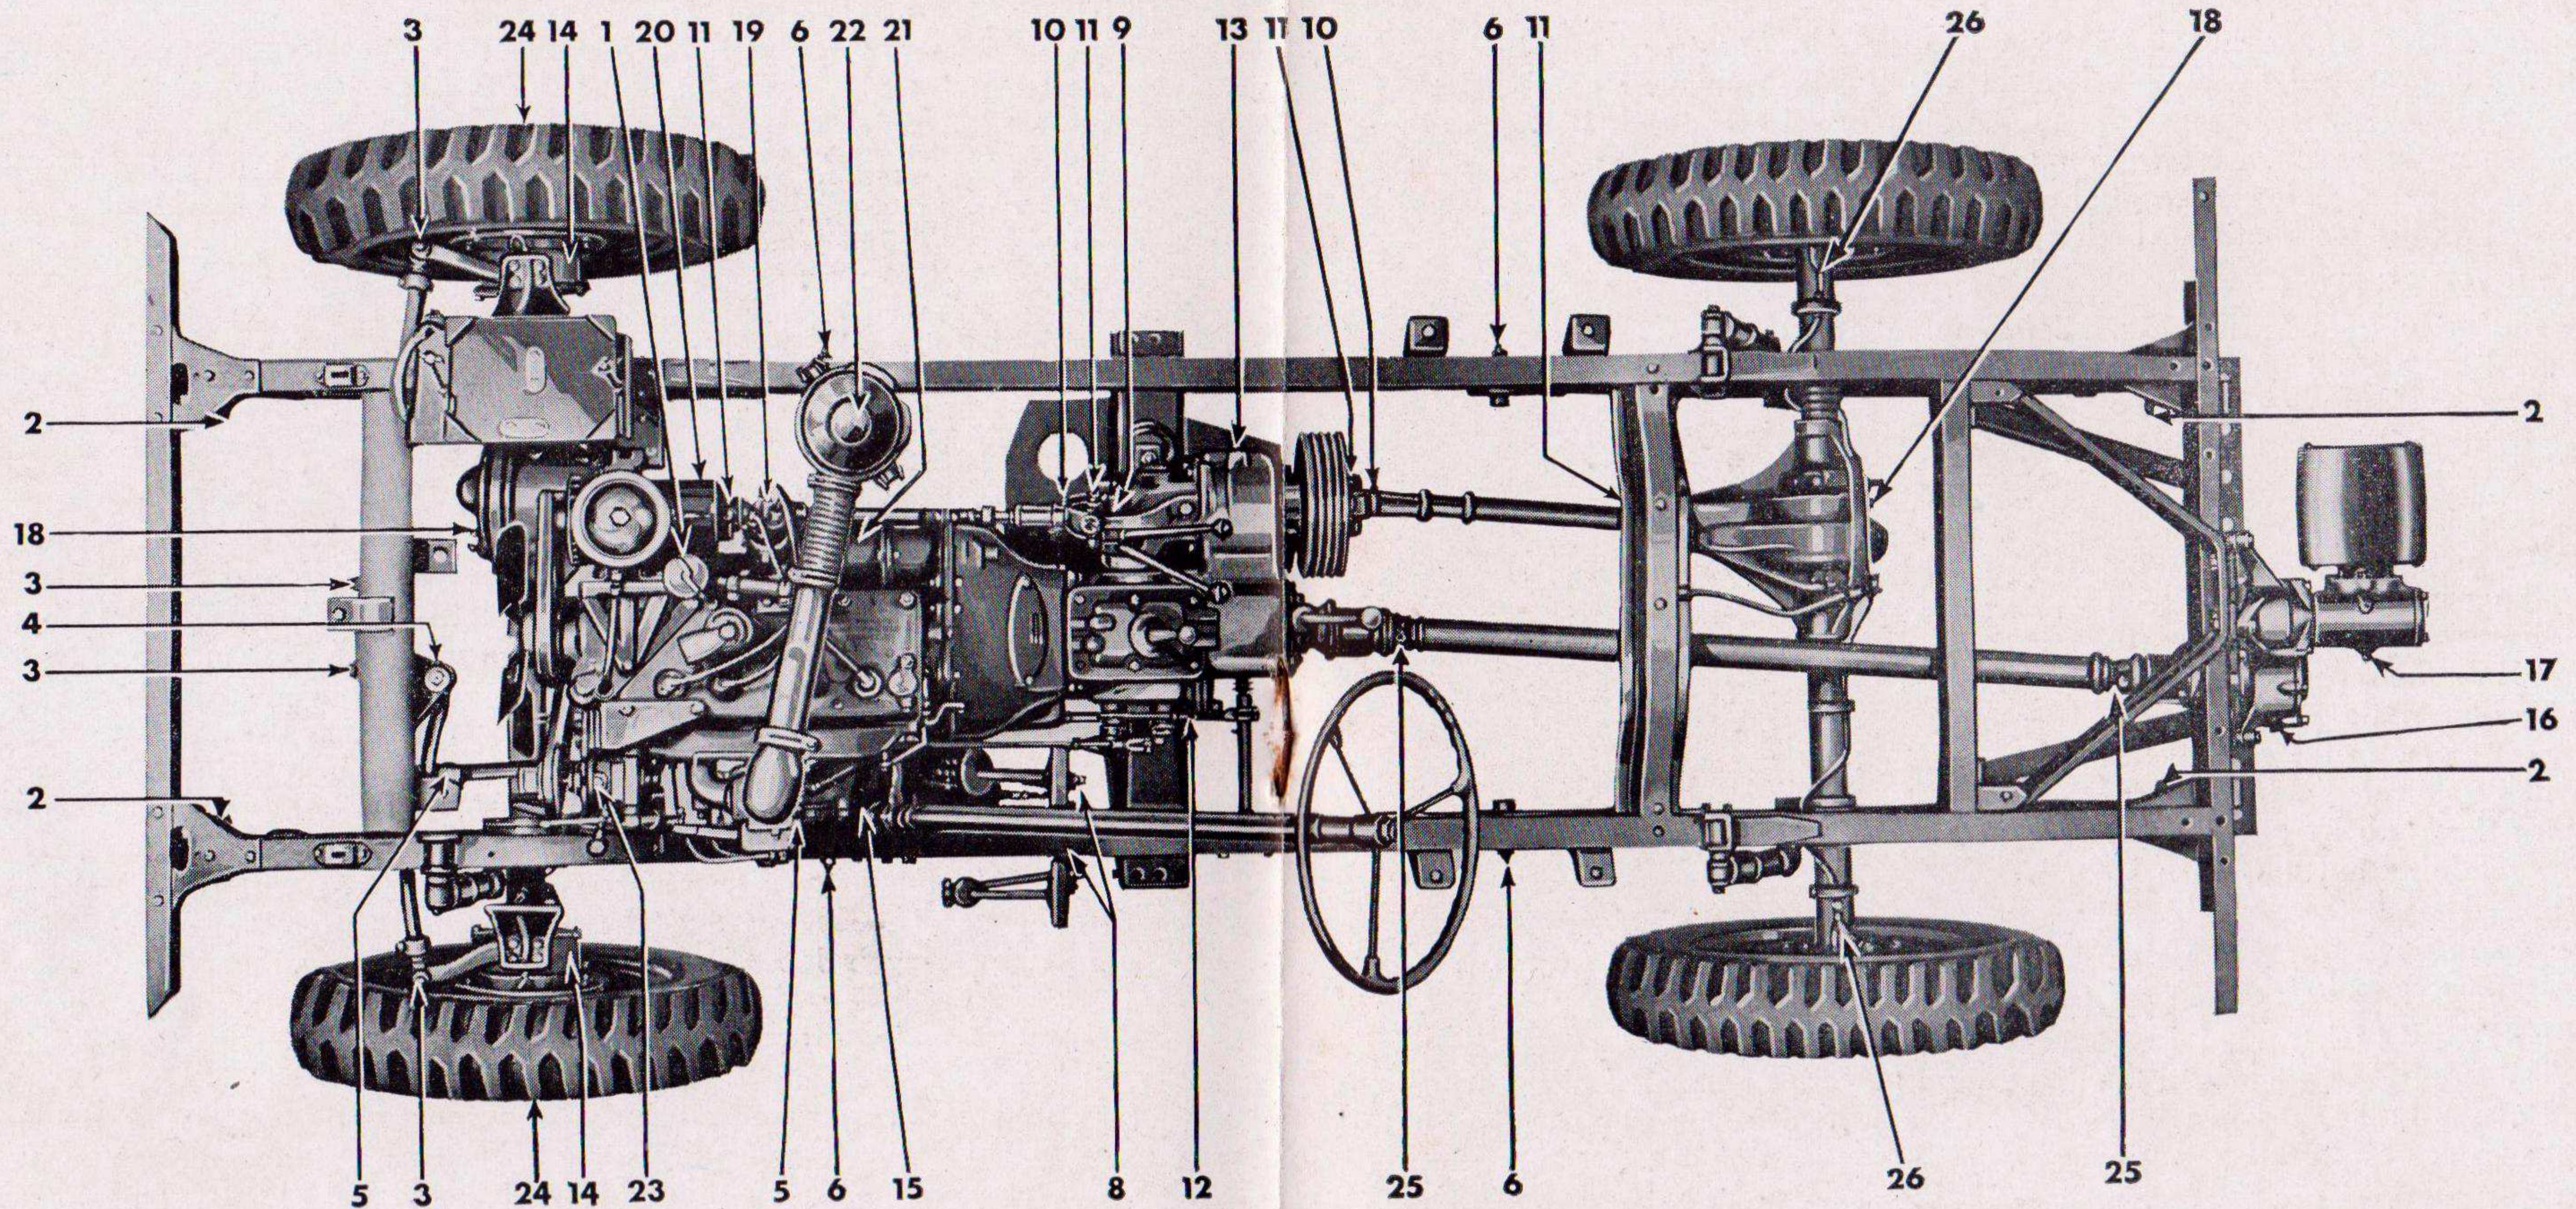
CHASSIS, SHOWING PARTS REQUIRING LUBRICATION
